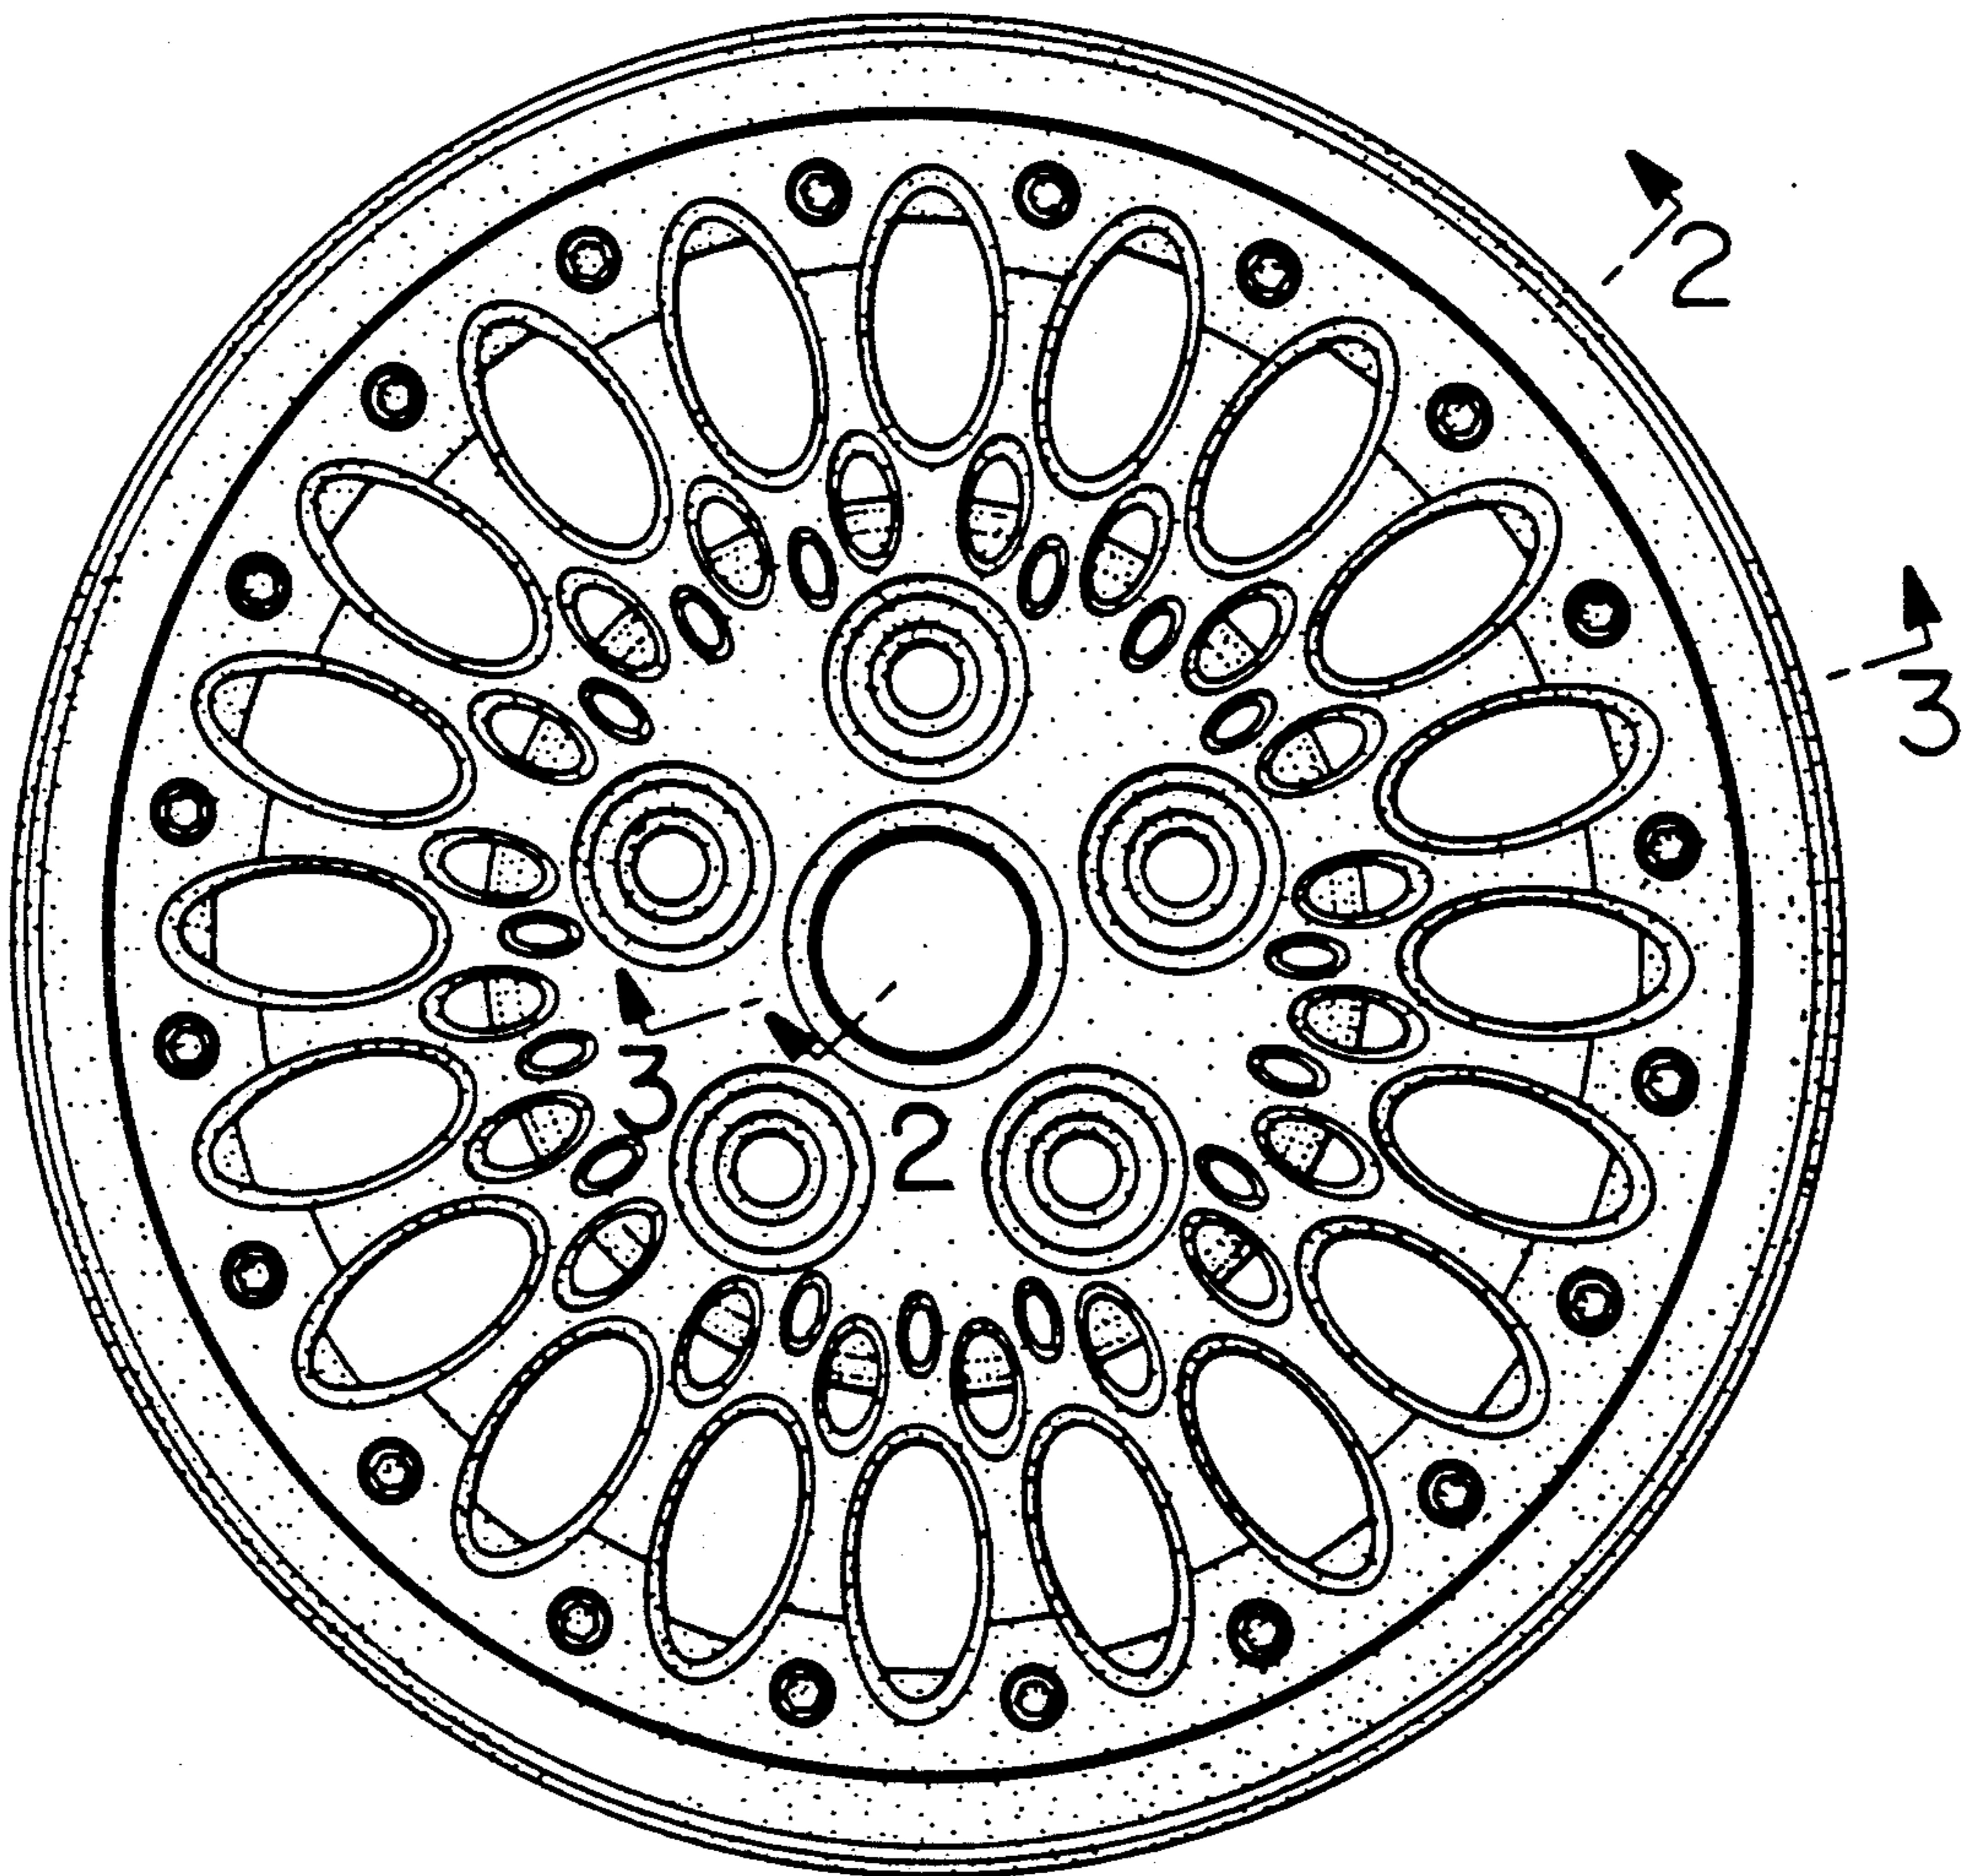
is a front elevational view of a vehicle wheel segment showing my new design.
